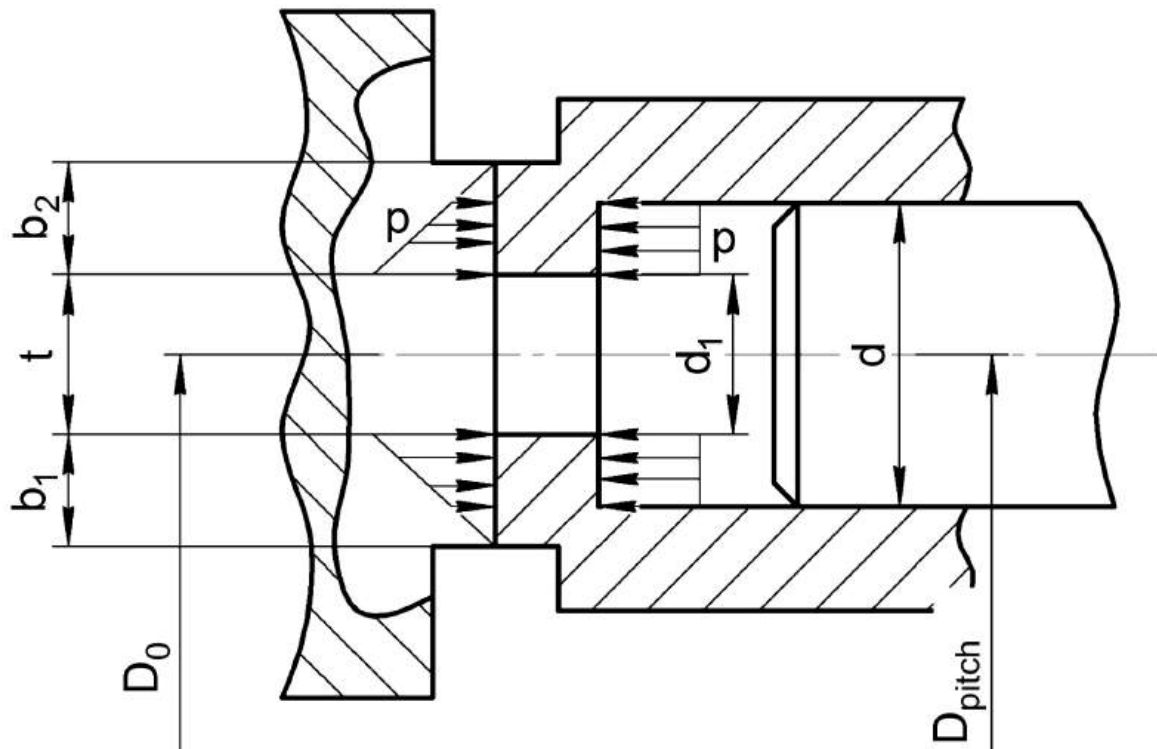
The design scheme of the pumping unit of the axial pump
